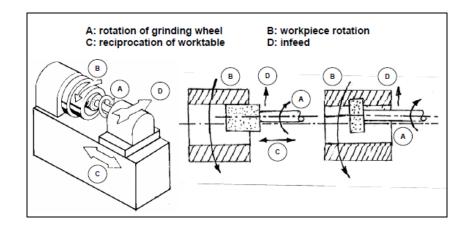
(a) Internal Center less grinder (b) Internal (traverse grinding and plunge grinding)
